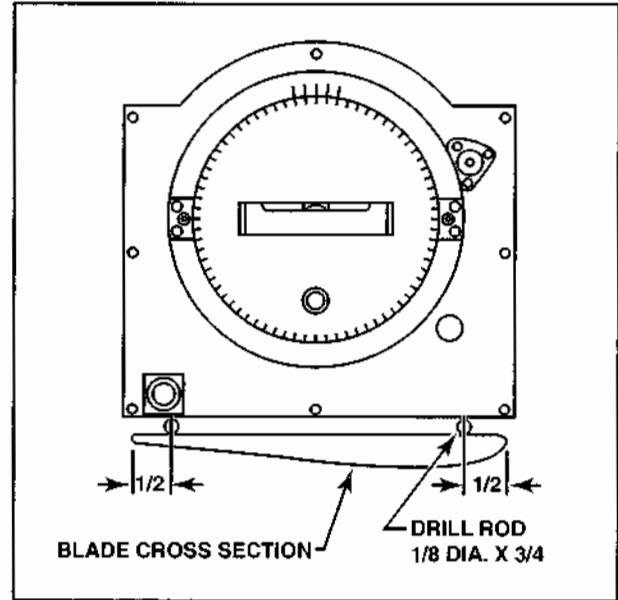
To compensate for blade curvature, small pieces of 1/4 inch drill rod are attached to the propeller blade to provide a level surface for the protractor.
